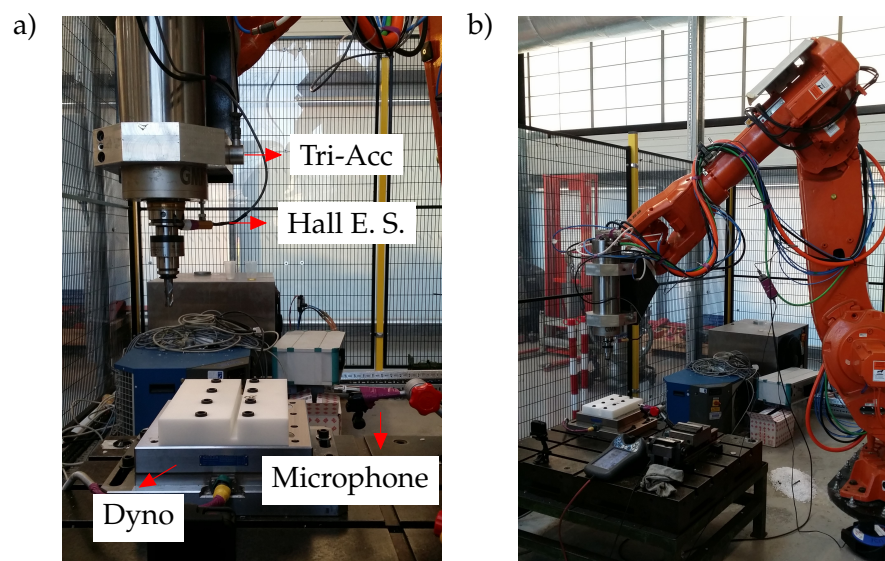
The experimental set-up of the machining trial a) Front View b) Isometric View
